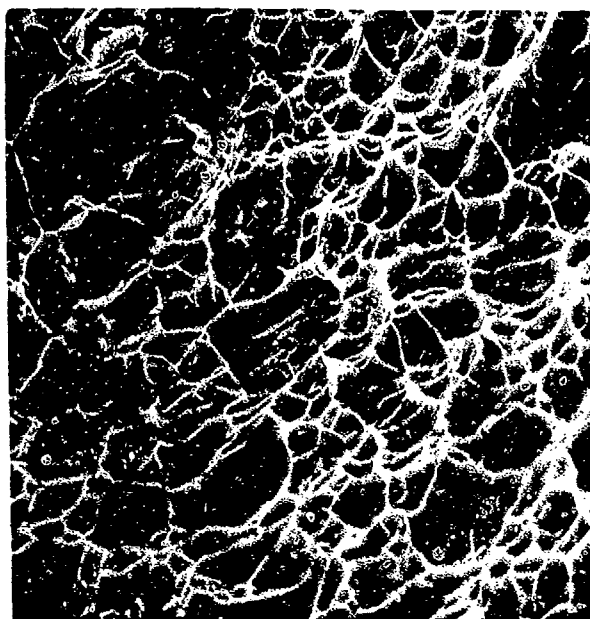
Edge of AX-110 weld Charpy specimen tested at -83°C , 4000x.
